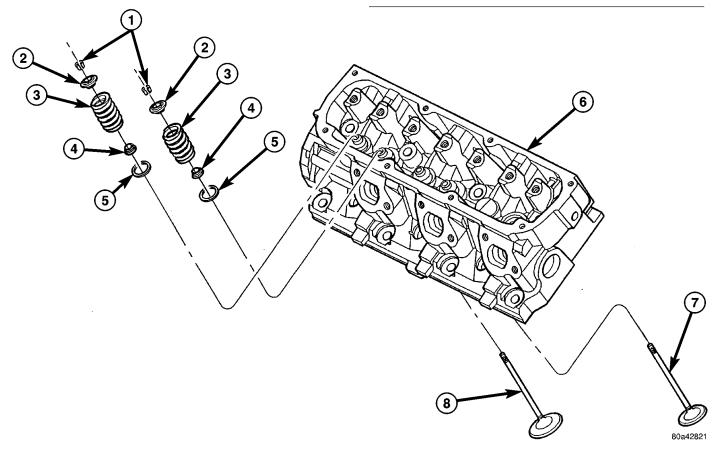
VALVE SPRING - REMOVE/INSTALL
